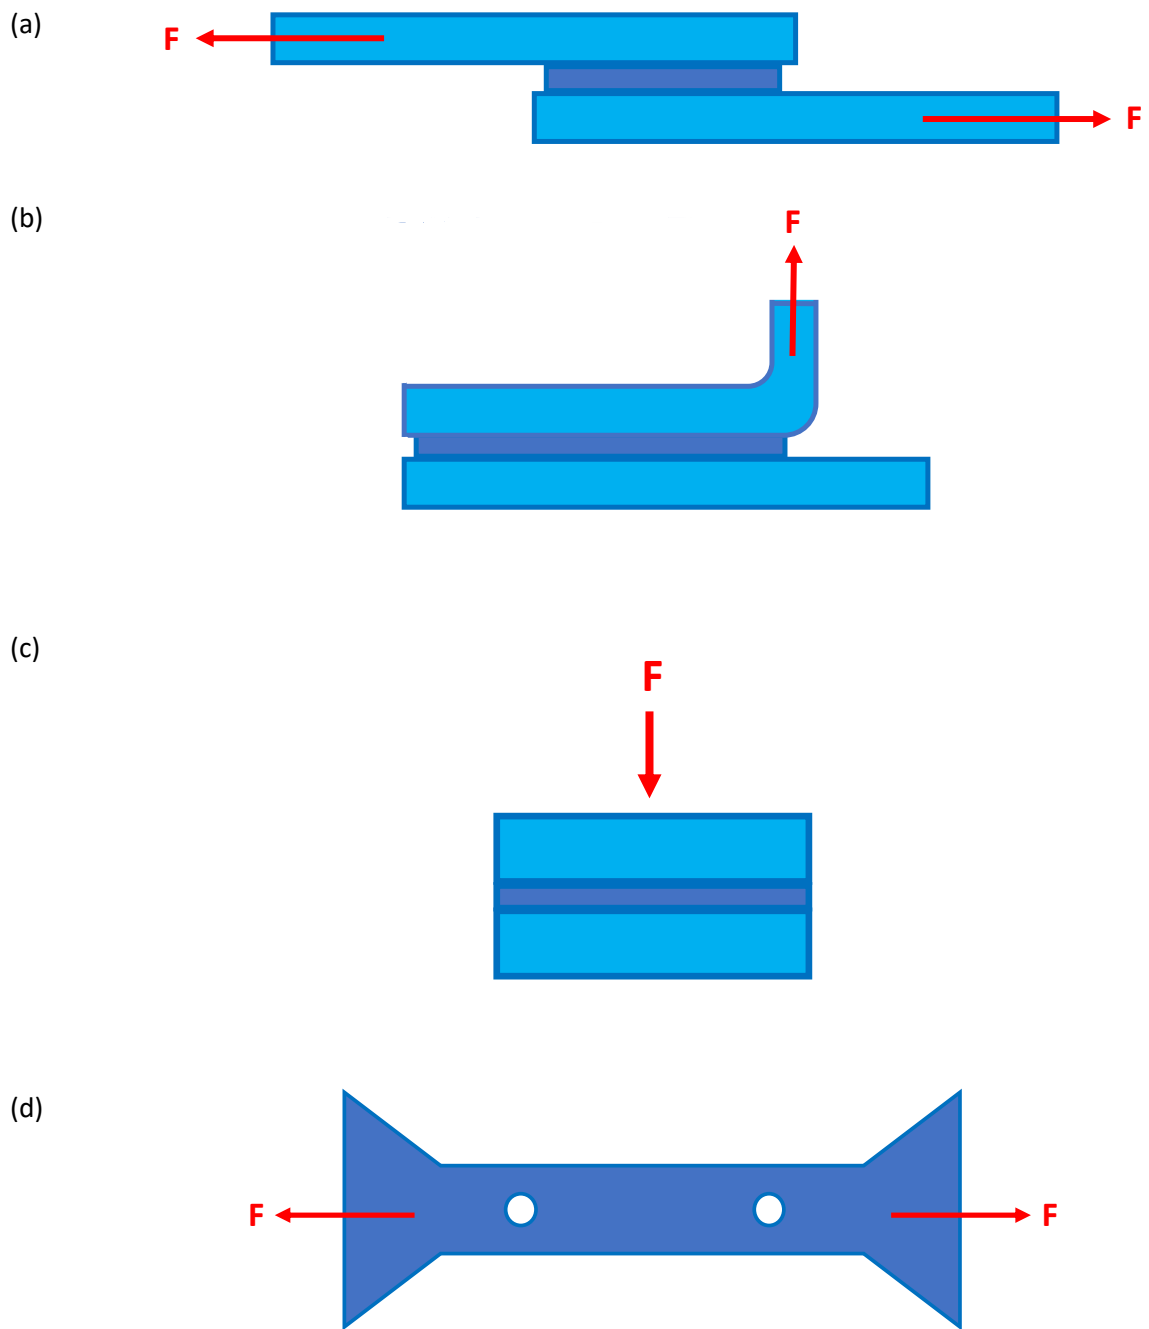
3: Schematic of different adhesive tests where the dark blue shows the adhesive layer. (a) Lap shears, (b) T-peel tests, (c) Compressive shear and (d) Tensile tests
